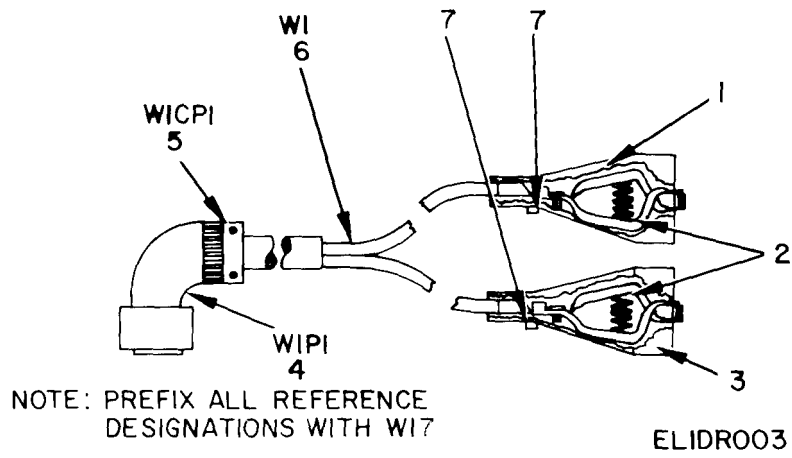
Cable Assembly, Power, Electrical CX-8998/URM-157.
